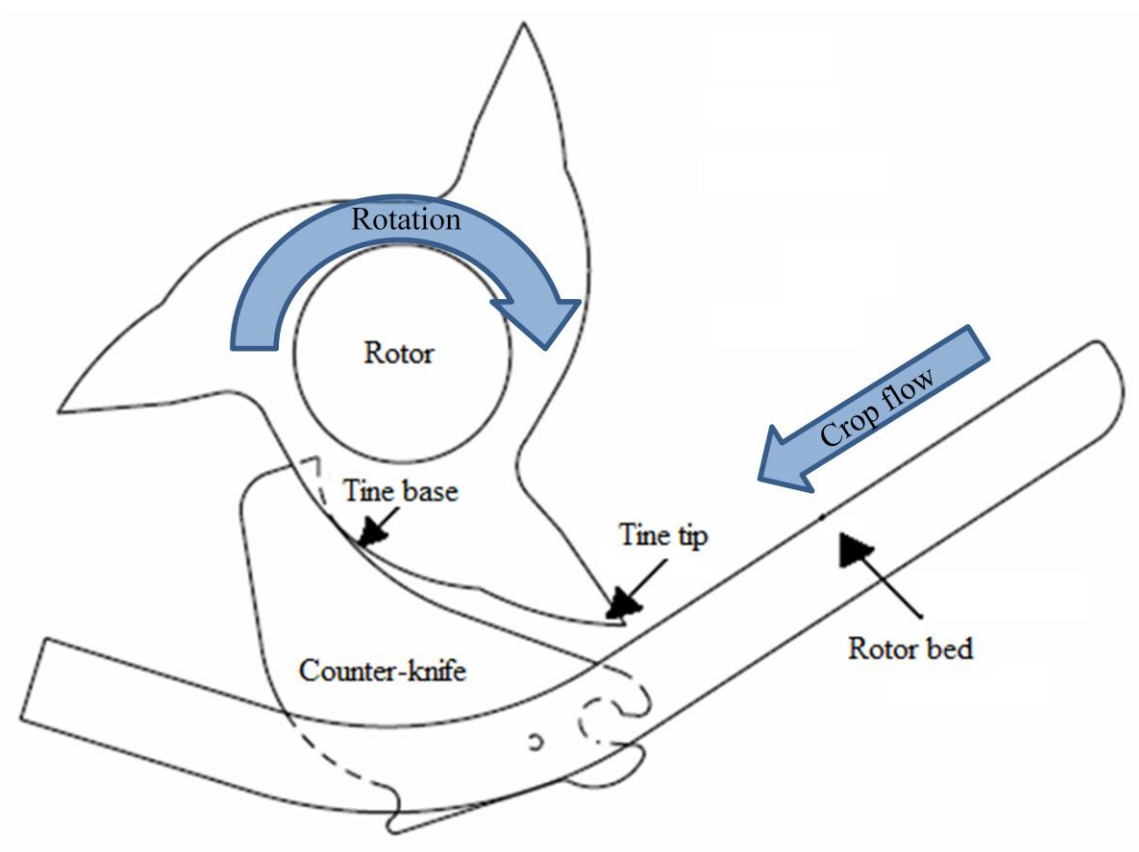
Drawing of a side view of a rotor tine, counter-knife and the rotor bed which shows that plant material at the base of a tine is compressed and cut prior to the plant material at the tip of a tine.
